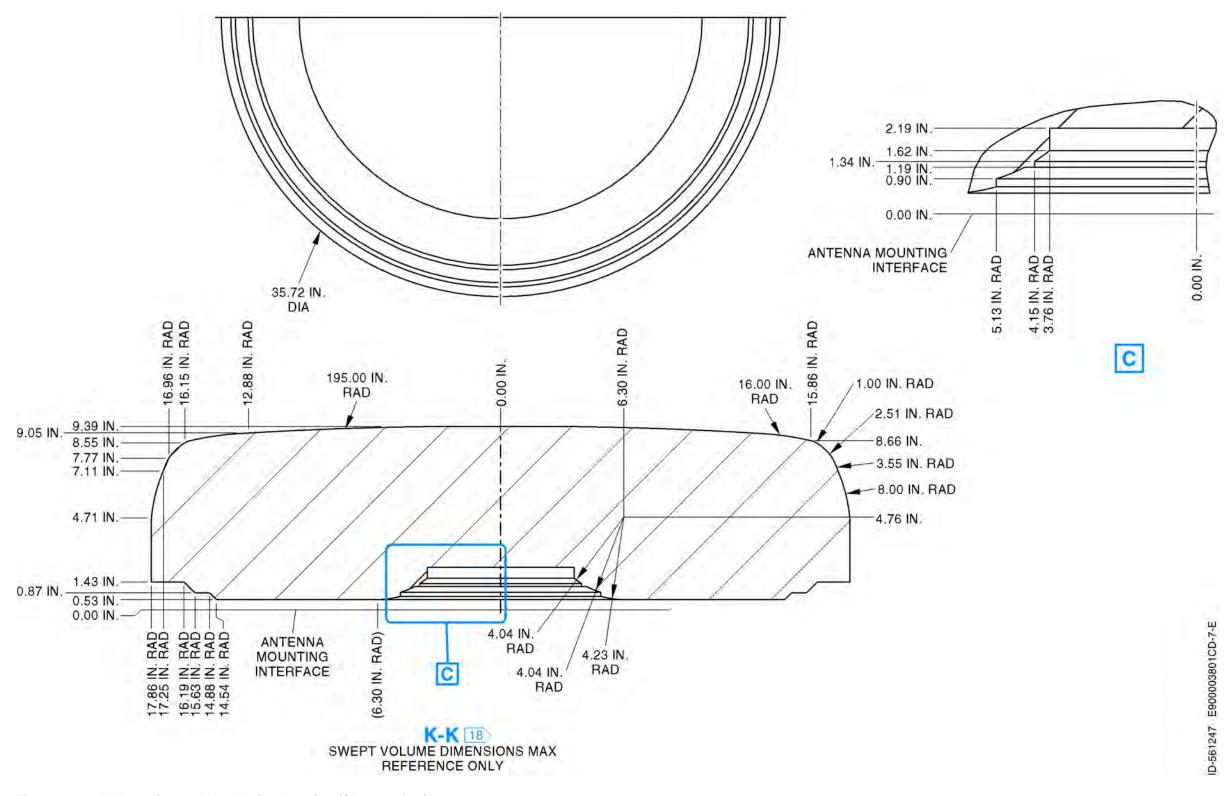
FMA Outline and Installation Drawing (Sheet 7 of 12)
